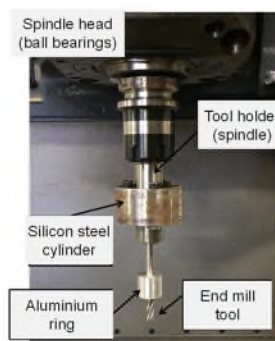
Tool holder with end mill as dummy spindle system in spindle head
